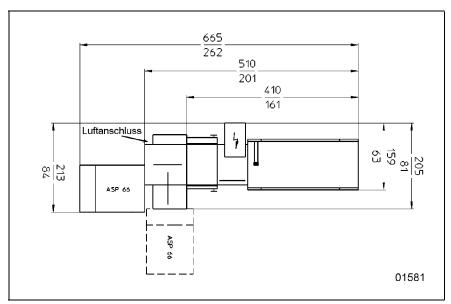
Floor plan K 800.2 - Continuous feeder (measure cm)
